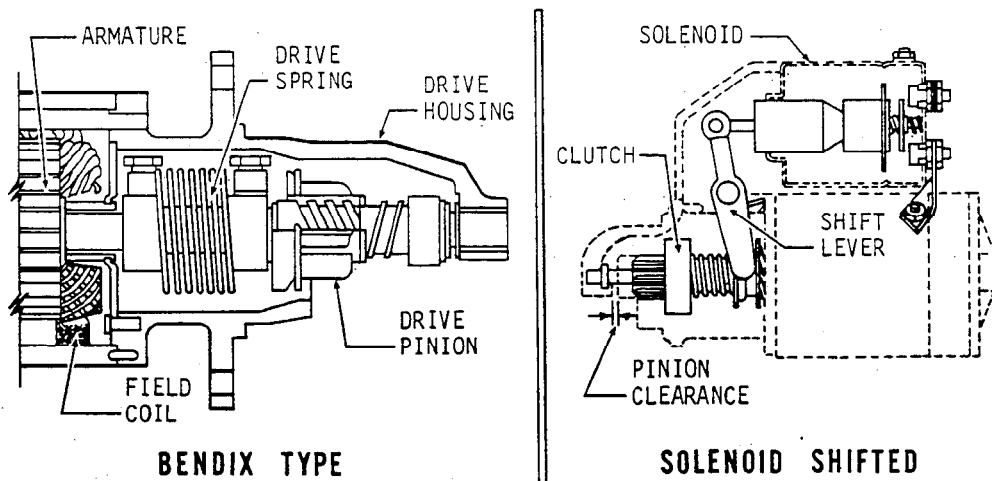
STARTING MOTOR DRIVE TYPES
